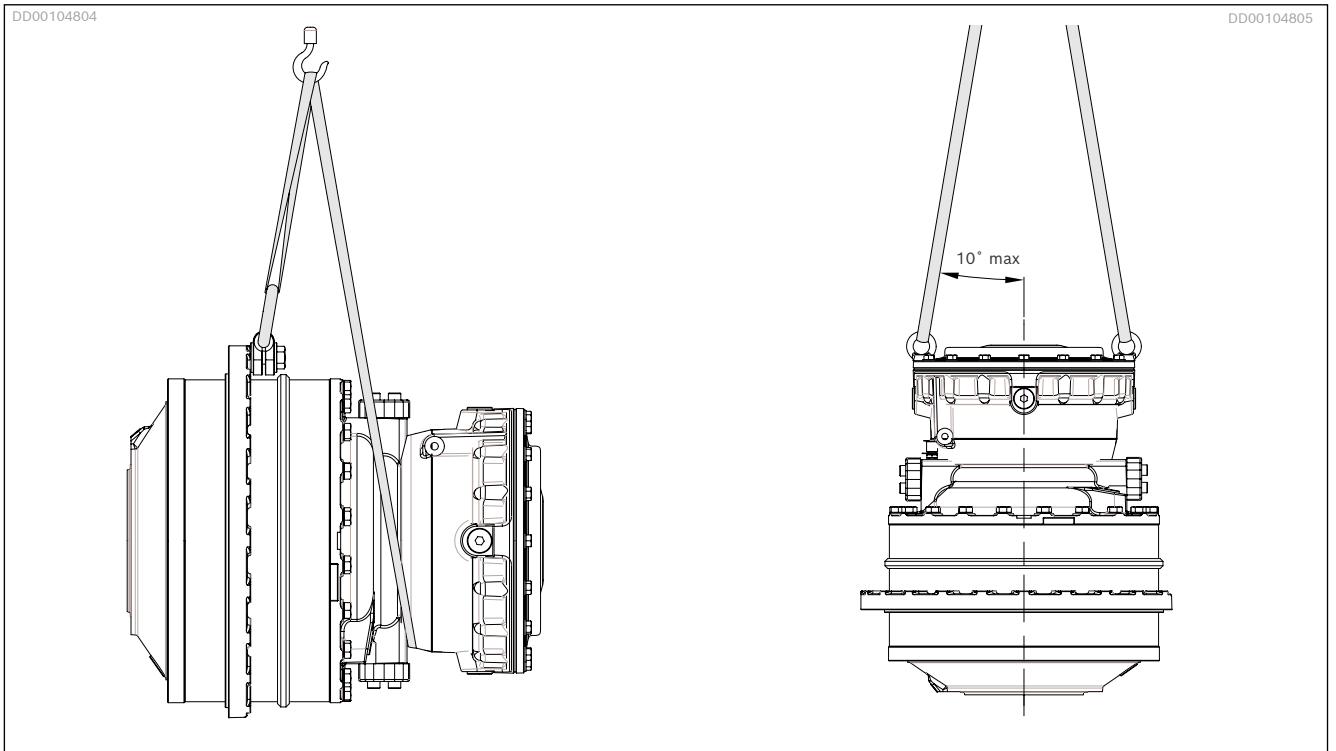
Example, lifting CA 210 with mounted MDA brake
